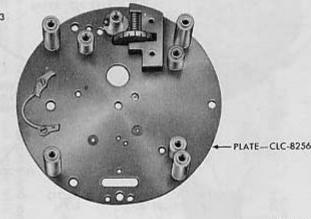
Message Center Clock M1 — Regulator Staff, Train Bridge Assembly, and Fourth and Third Wheels Removed
